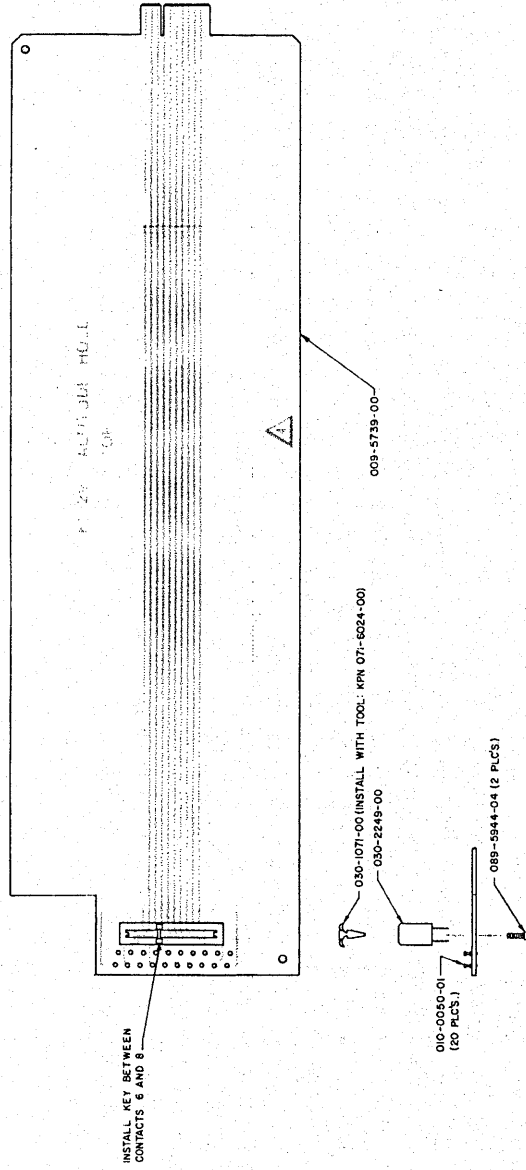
ALT. HOLD EXTENDER BD ASSEMBLY
